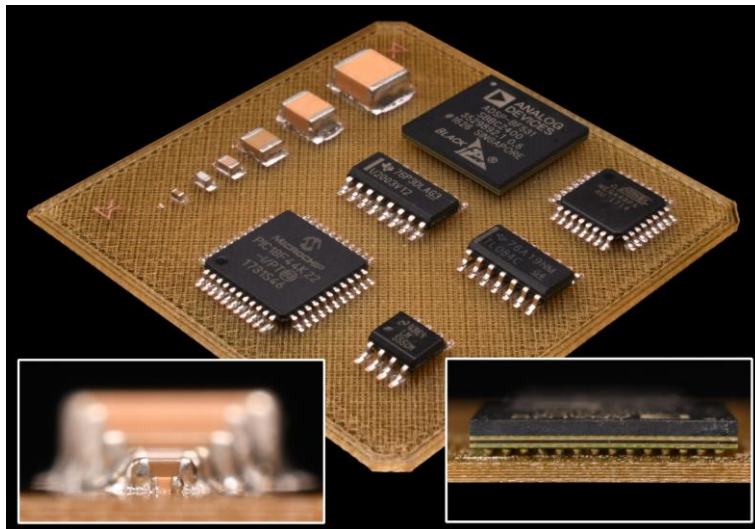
SMD components solder reflowed onto a PEI test board using SAC solder paste.
